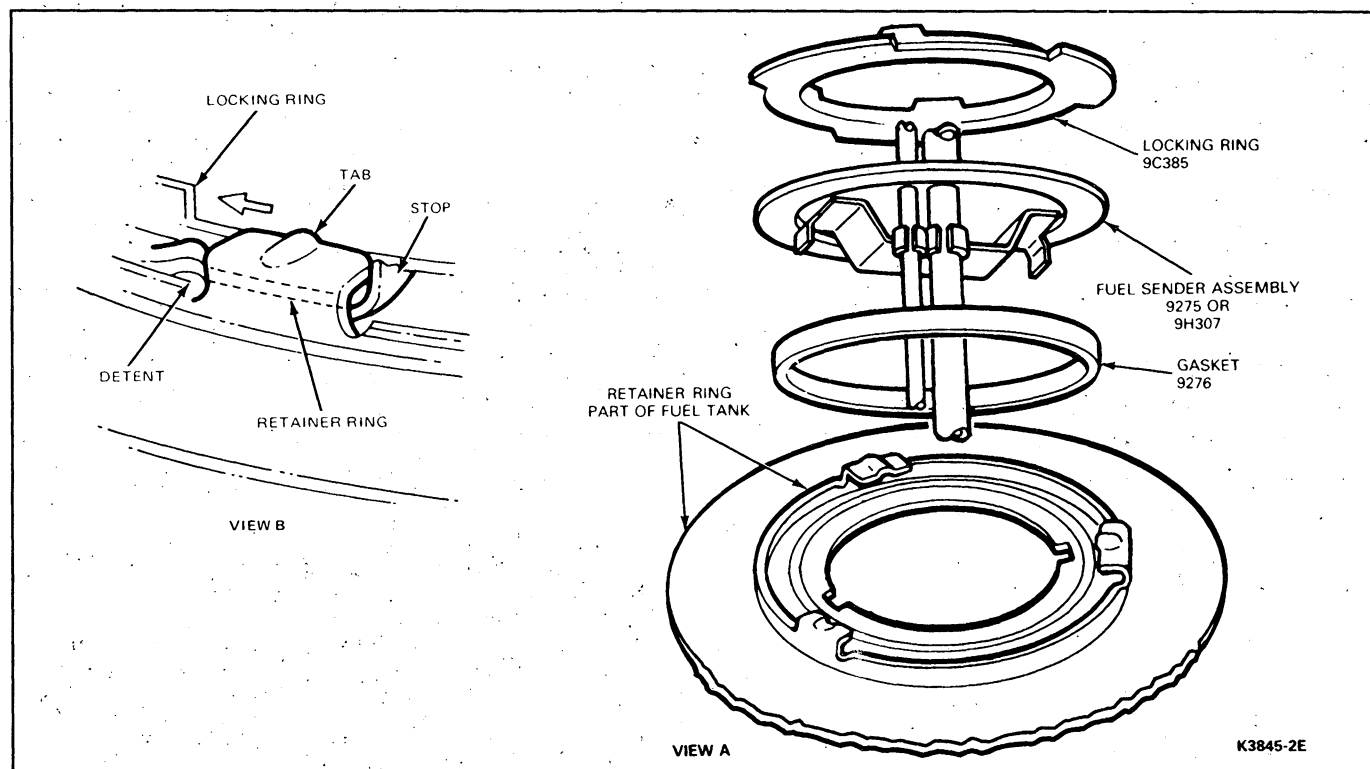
Fuel Tank Sender Installation (Metal Lock Ring Type)
